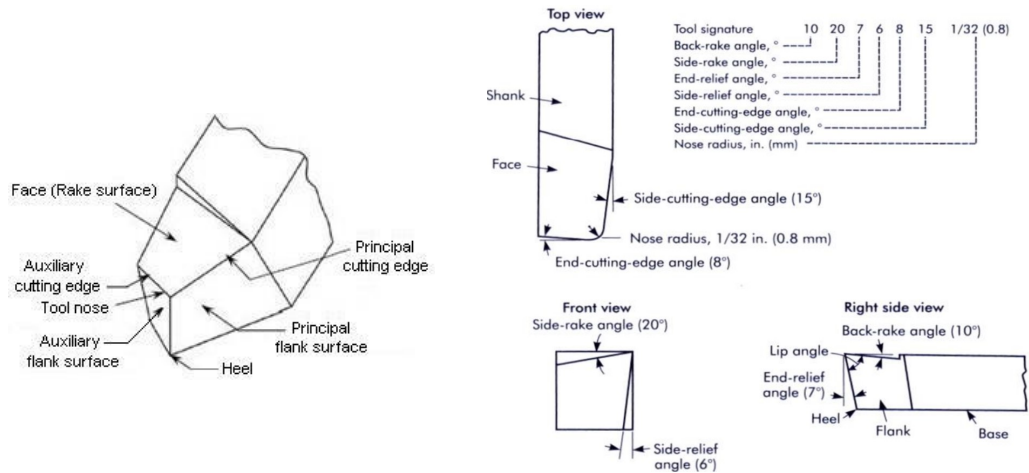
Basics features of single point cutting (turning) tool and the surfaces and angles on the tool
